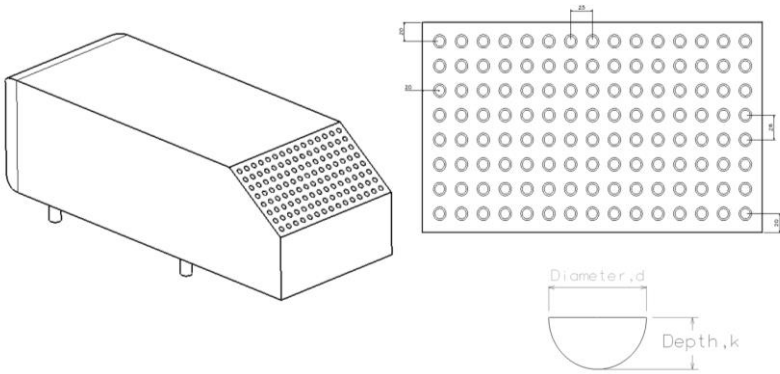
Ahmed body with dimple surfaces and dimensions in mm
